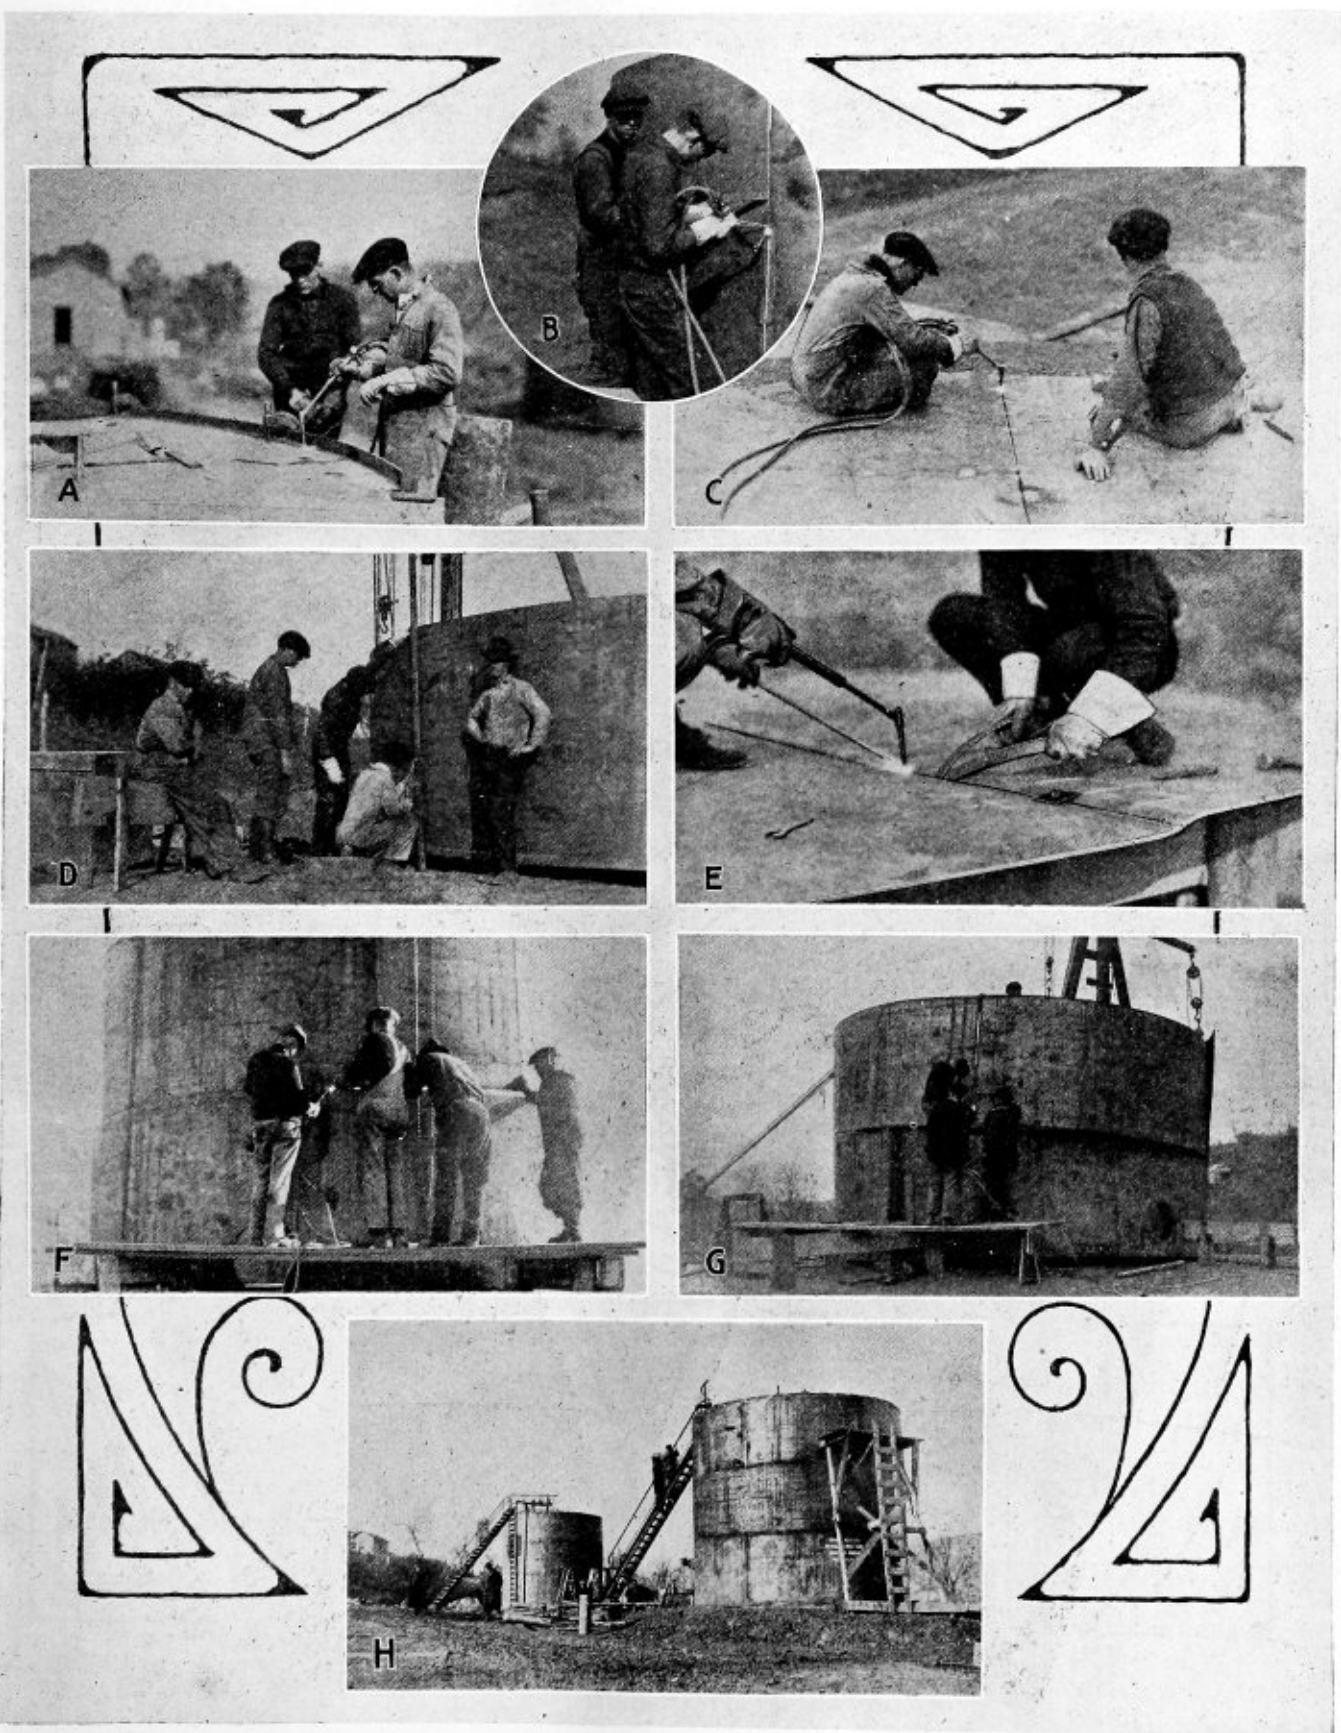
(A) Welding Curb Angle to Tank Bottom. (B) Welding a First Course Vertical Seam. (C) Tack Welding a Bottom Seam. (D) Lining Up the First Course Plates. (E) Nearing the End of a Seam. (F) Welding the First and Second Ring Seams. (G) Finishing the Second Ring. (H) The Completed Tanks.
